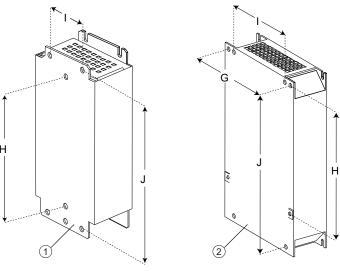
Mounting dimensions of motor reactor, frame size FSA
